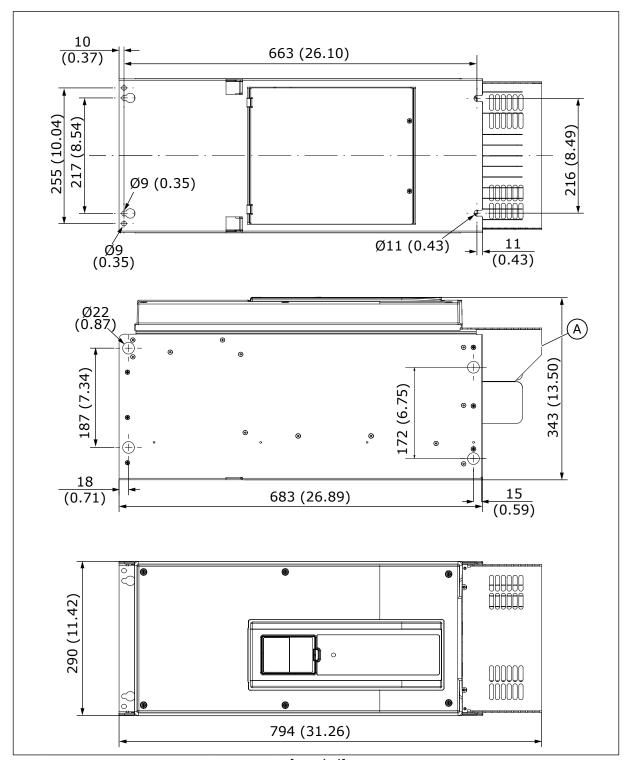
The dimensions of the AC drive, MR8, [mm (in)]
